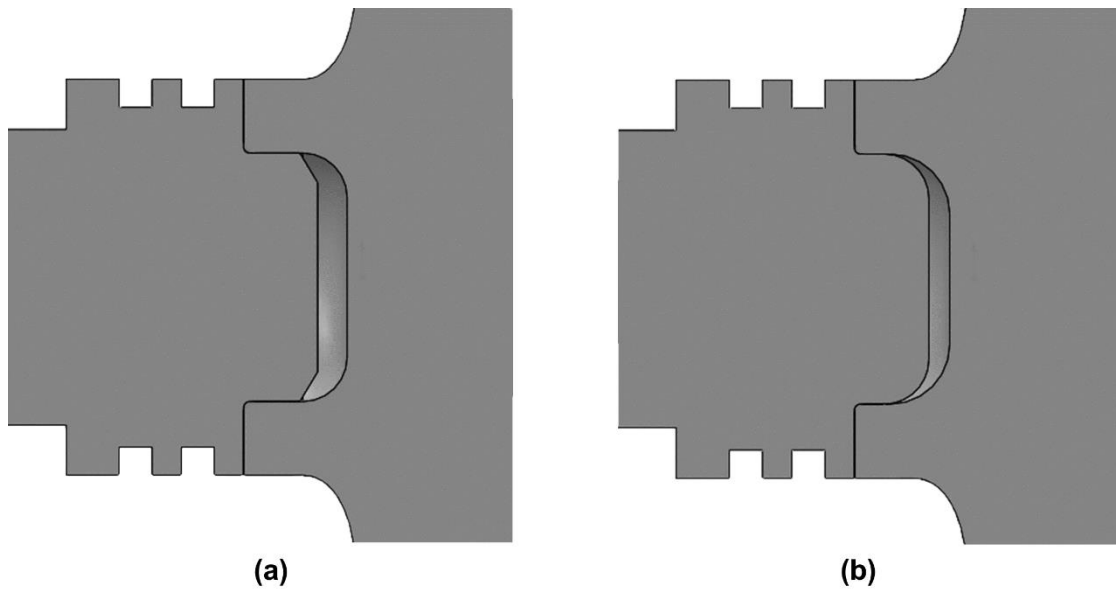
Cross sectional view of the (a) baseline and (b) alternative shape of the shaft-rotor cavity.
